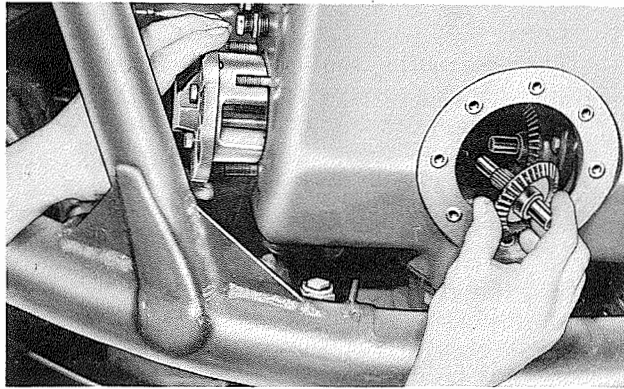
Positioning Drive Gear through Hand Hole in Rear Oil Pump and Sump Housing
